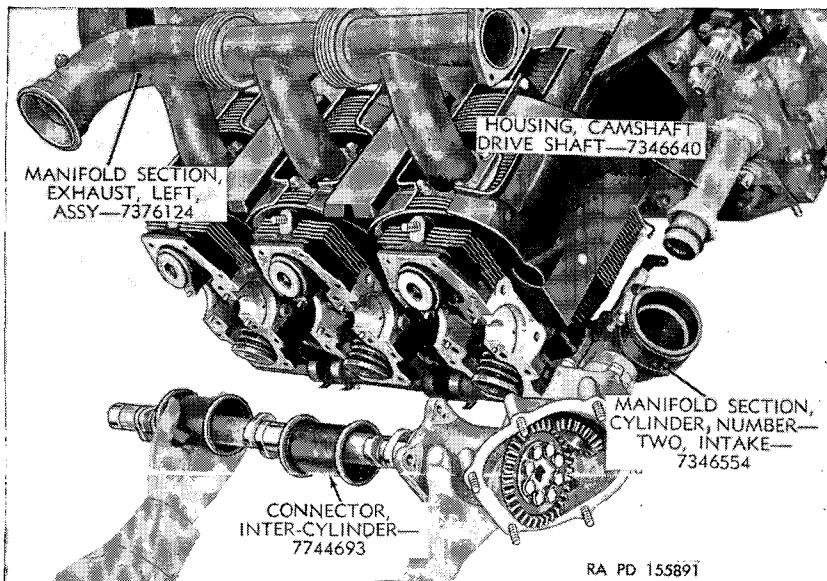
Removing camshaft and gear housing—left (2-4-6) side.
